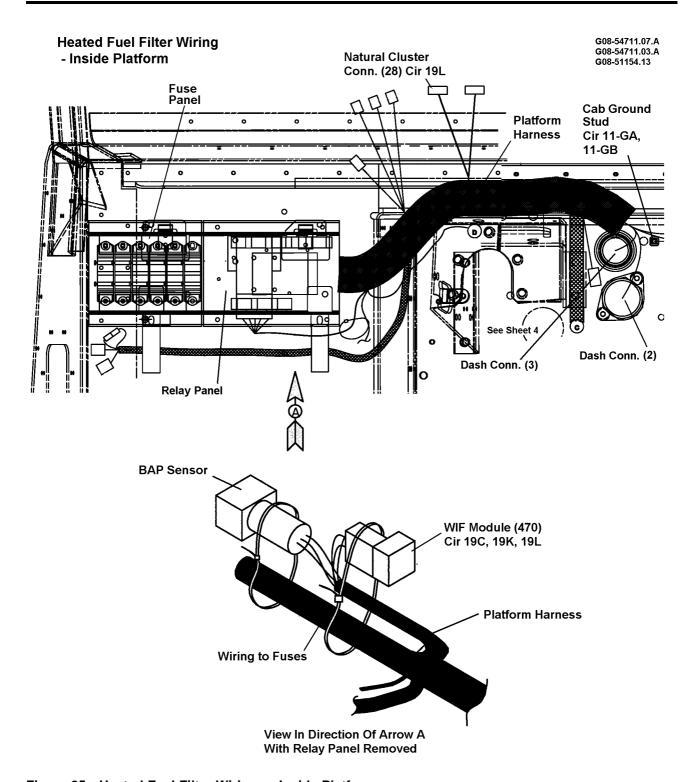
Heated Fuel Filter Wiring — Inside Platform
